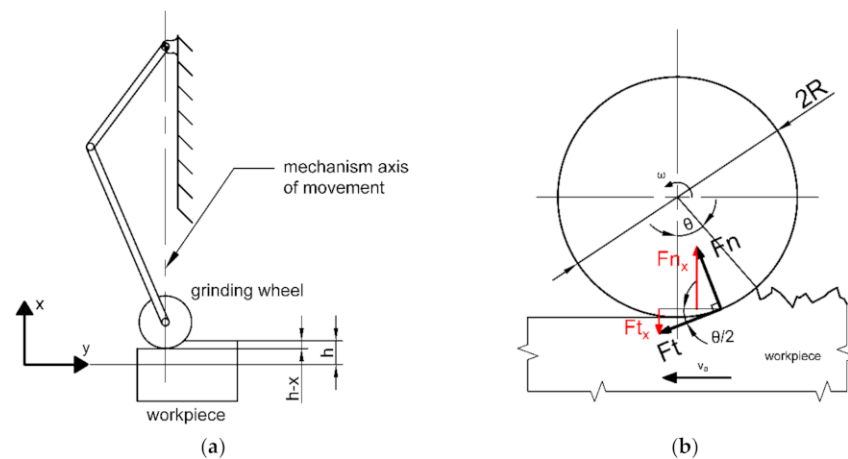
Scheme of the workpiece position in relation to the mechanism axis of movement (a); deburring forces (b).
